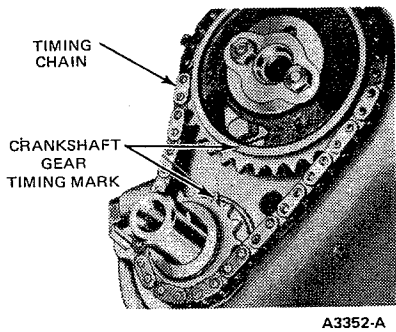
Camshaft Sprocket and Timing Chain Aligning Marks
